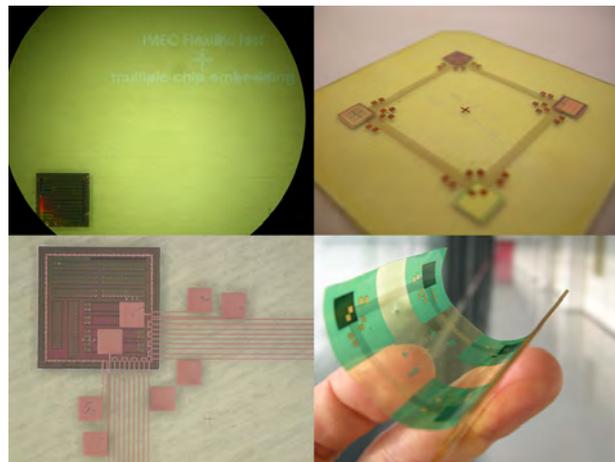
Several pictures of the fabricated substrates with embedded chips: a placed chip (top left), 4 embedded chips interconnected by the Cu metallization layer (top right), a close-up (bottom left) and the end result, with soldermask and NiAu finish (bottom right)
